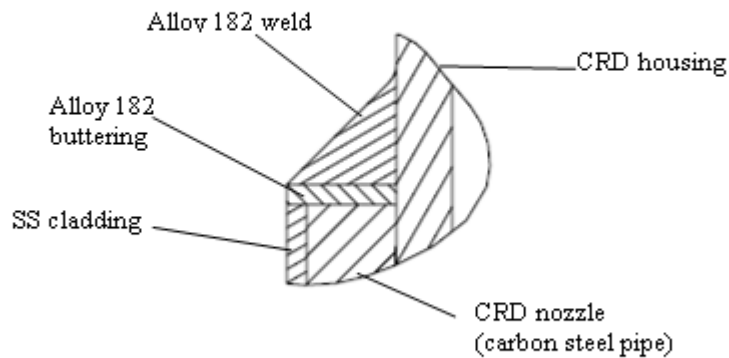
Detail of connecting weld between CRD nozzle & the CRD housing.
